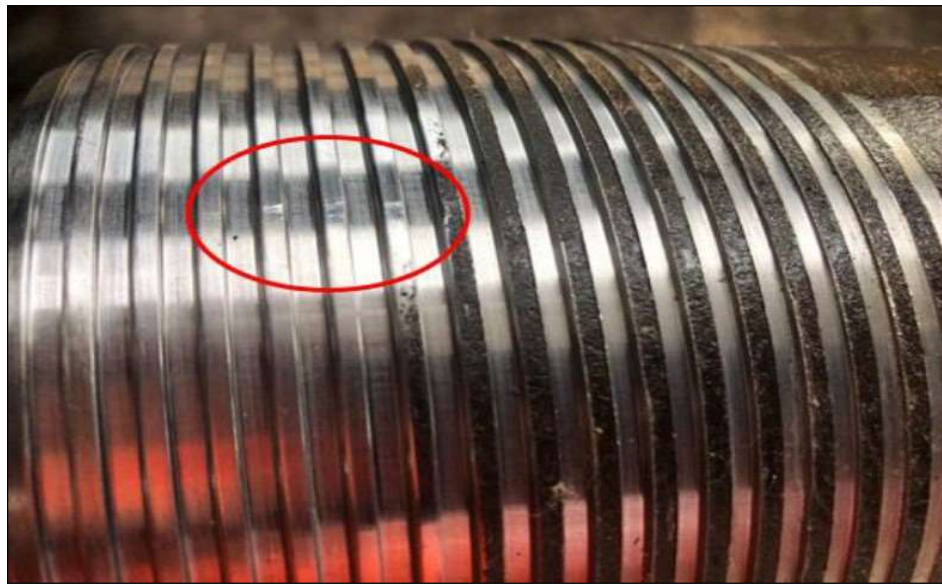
Longitudinal minor cuts on crest of pin connection: Can be used as is.
